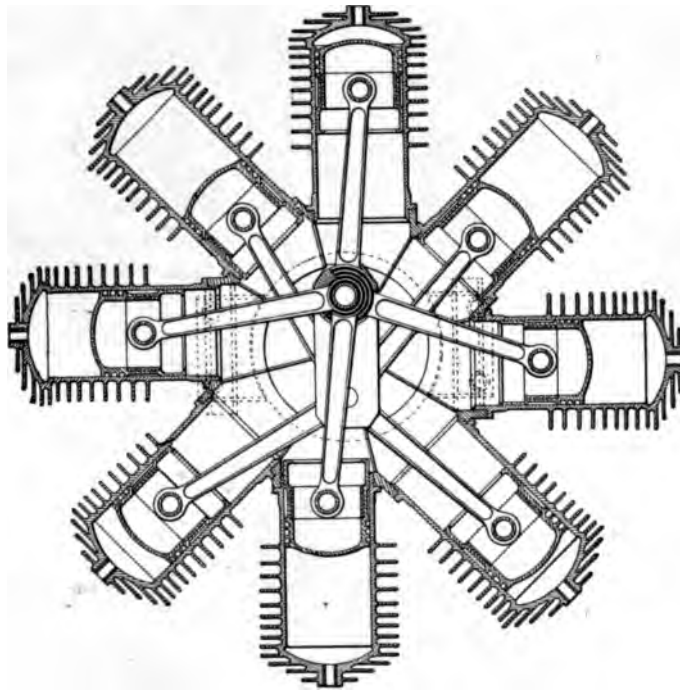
Cross-Section of Farcot 50-Horse-Power Air-Cooled Motor
